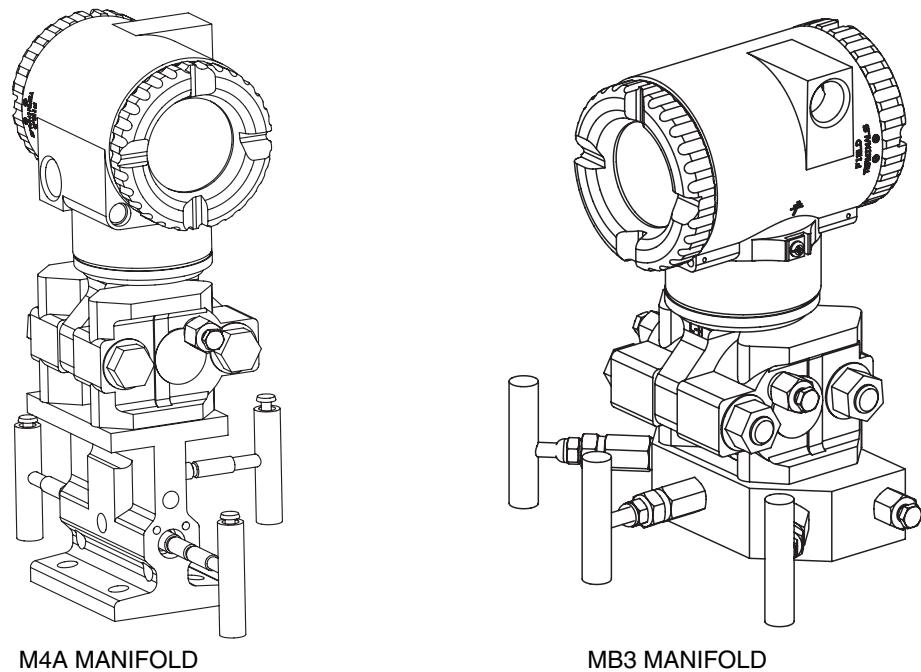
Typical Mounting of an IDP Transmitter Supported by a Bypass Manifold
